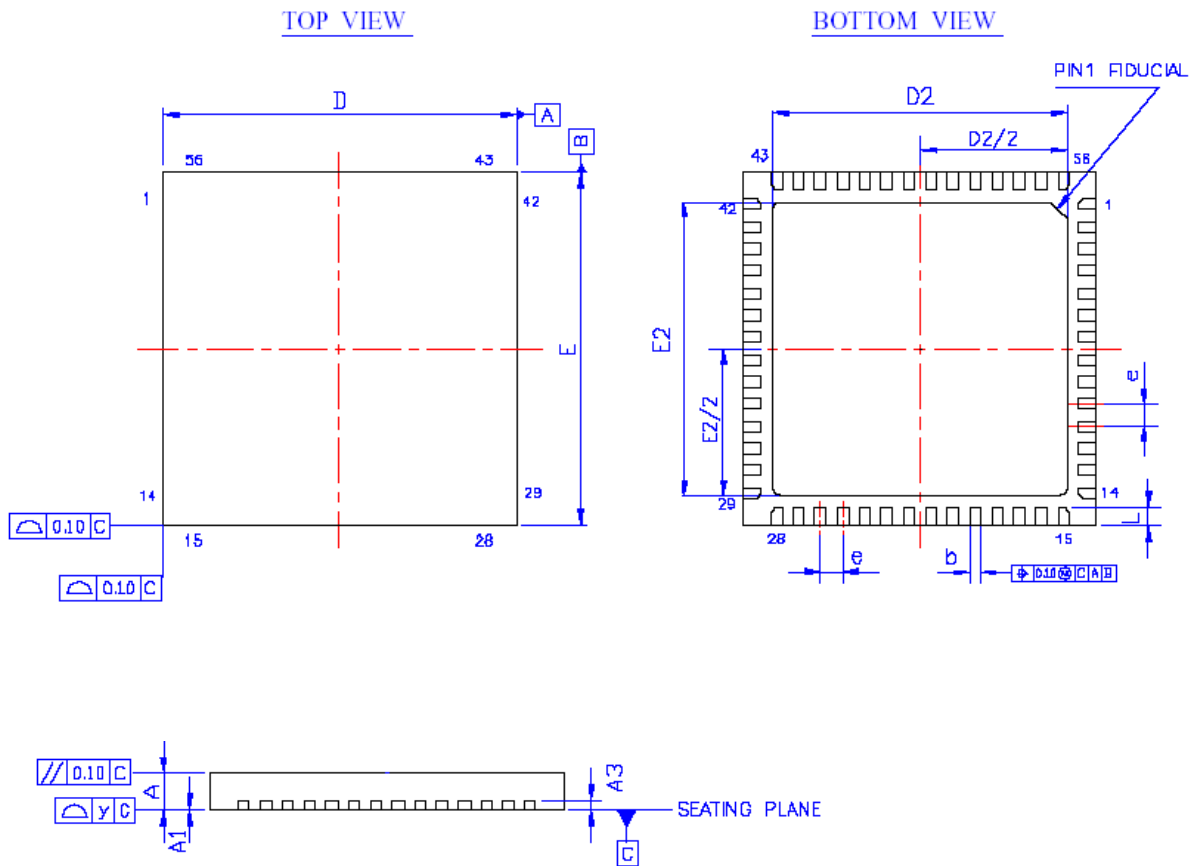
GL422/GL423 56 Pin QFN Package
